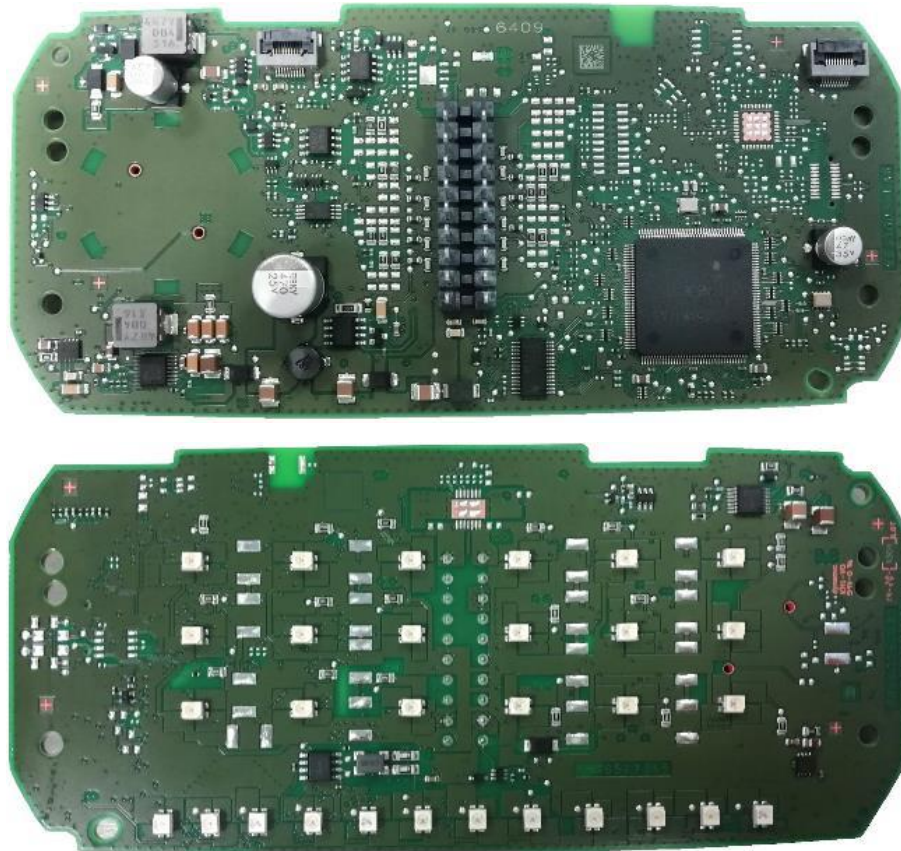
Top and bottom sides of the finished Bombardier Compact PCBA sample, assembled at BCM.
